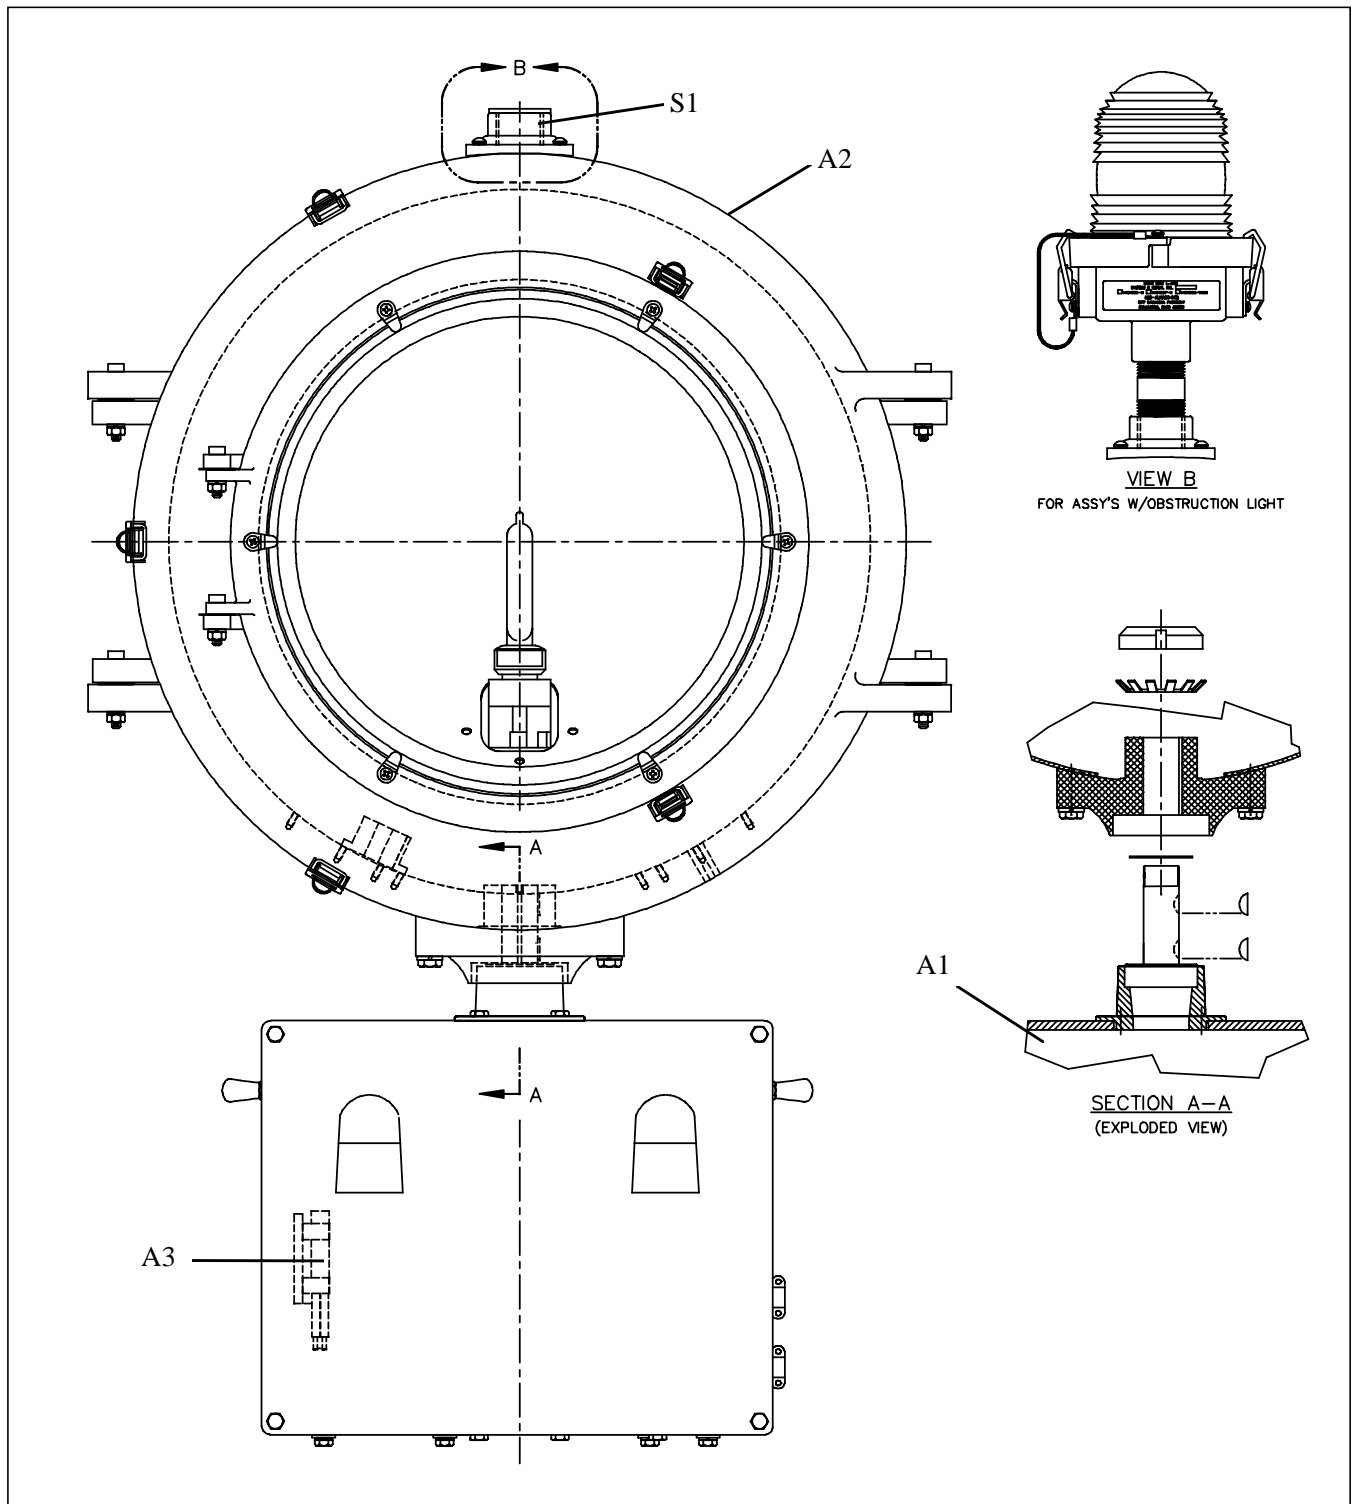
RB-6 Rotating Beacon Final Assembly (Export Version)
